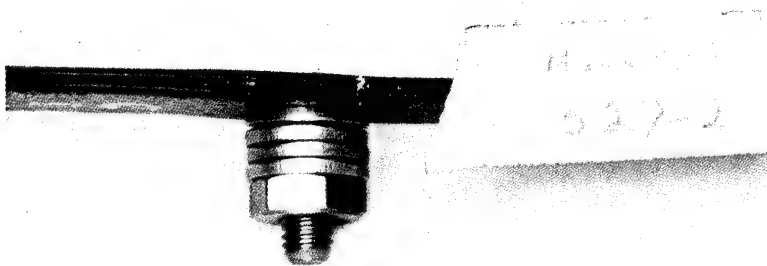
Typical Failure of Countersunk ULC Specimen (Tested With Fastener)
